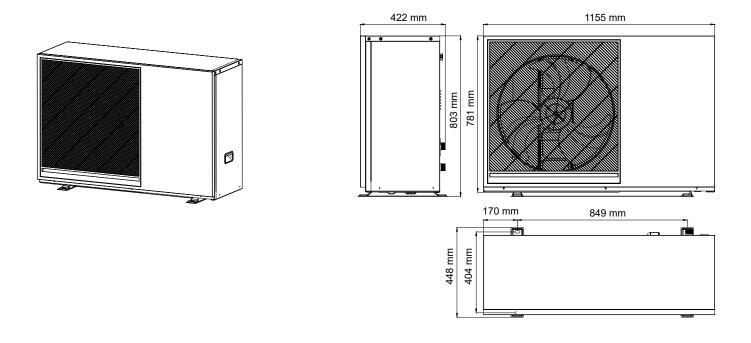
HPR290i120 & HPR290i160 heat pump dimensions
